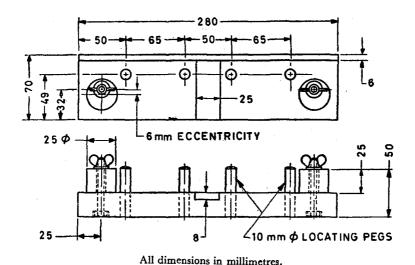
Wooden Jig for Locating Test Pieces in Clamp
